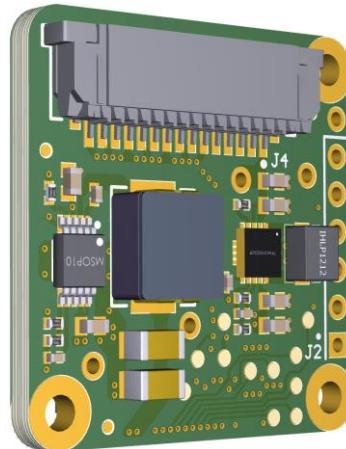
Technical Drawing of FPA-A/NDK-V1A
